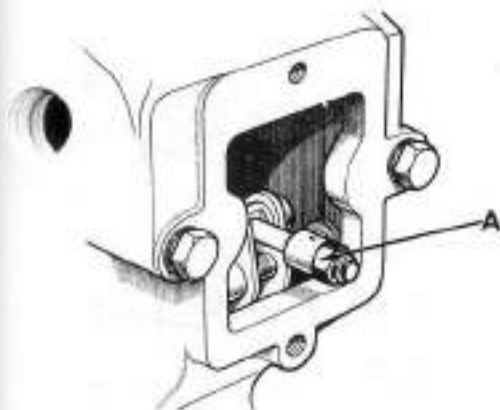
Remove adjusting nut (A) and outer spacer from behind nut when removing rockshaft and right support assembly from tractor. Refer to paragraph 202 for adjustment of nut.
